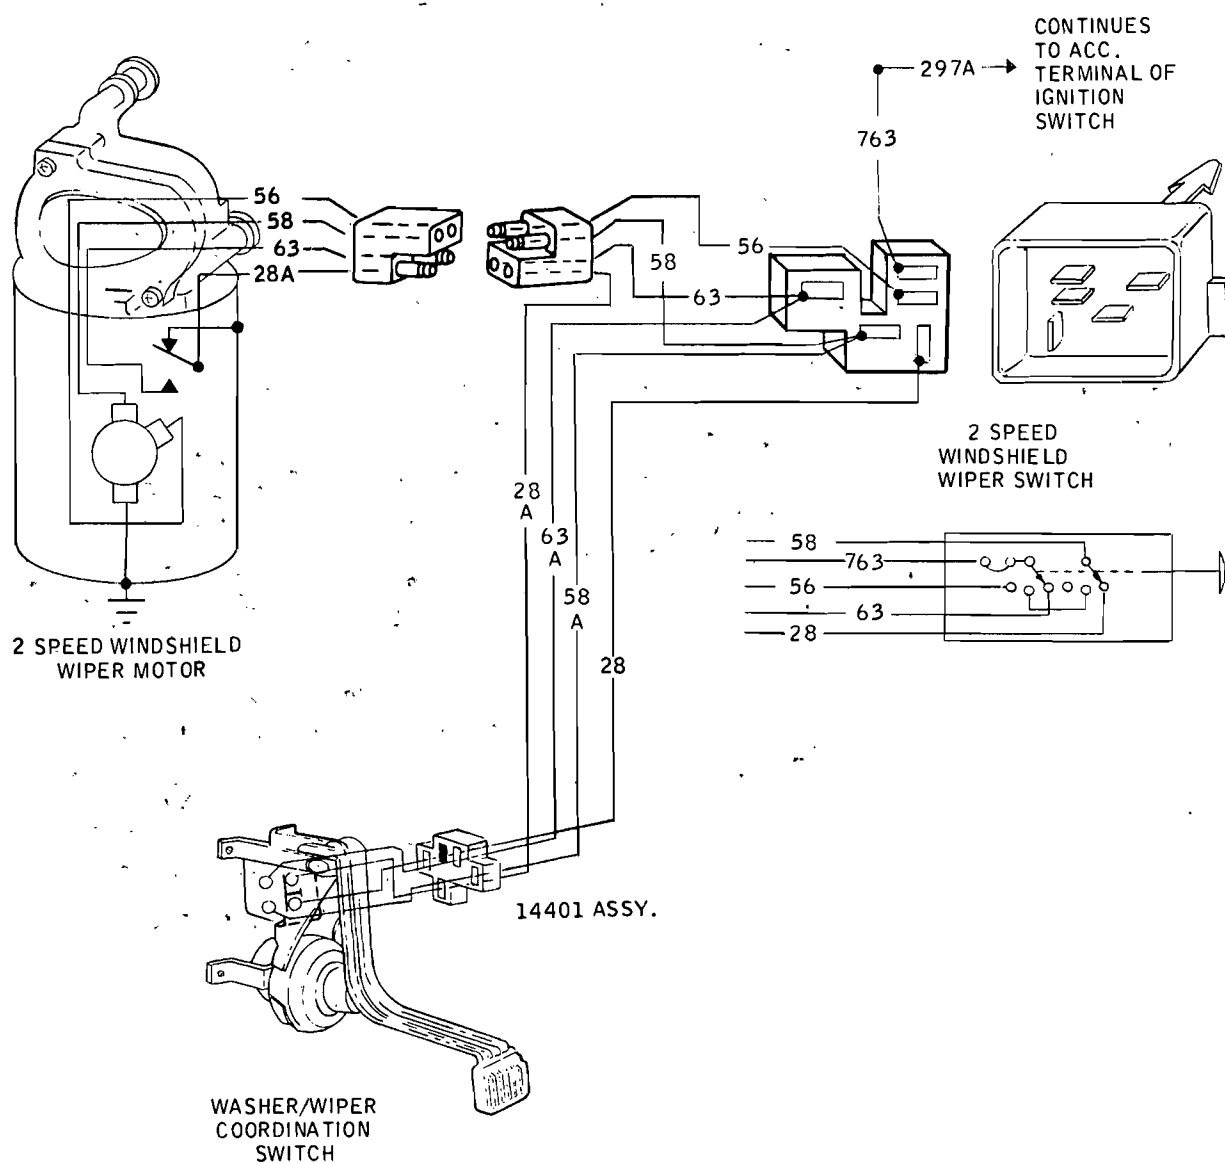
Cougar, Mustang Windshield Wiper Washer
